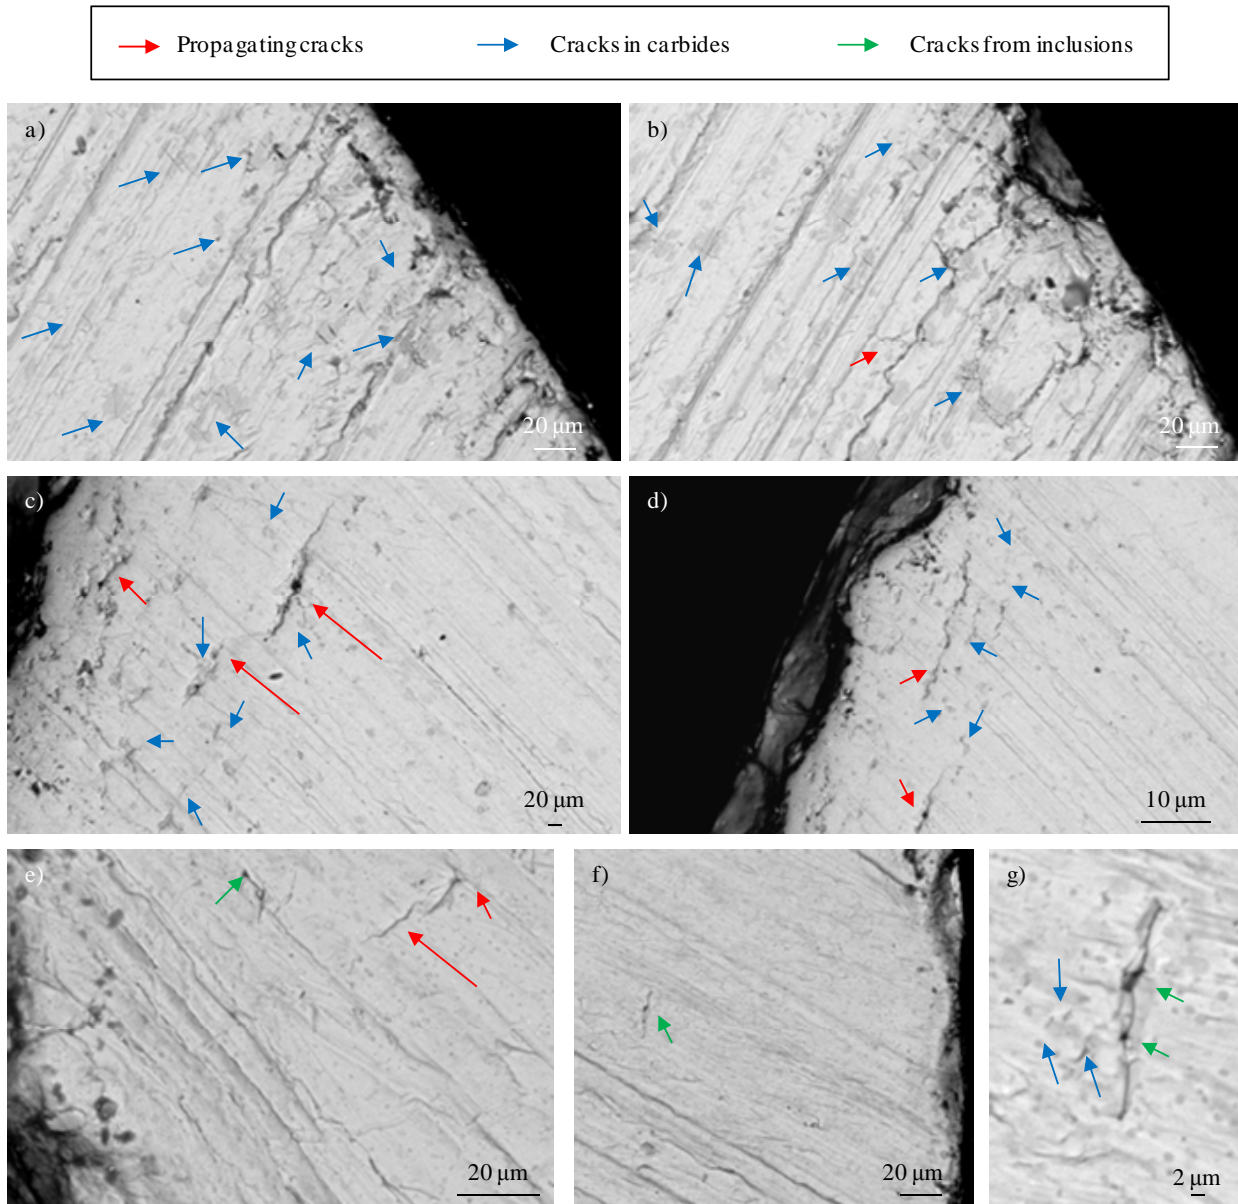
Cracks identified after 1500 strokes near the cutting edge of: a) and b) a 917A punch; c) and d) a 917U punch and e), f) and g) 917H punch when punching DP1000 2 mm thick
